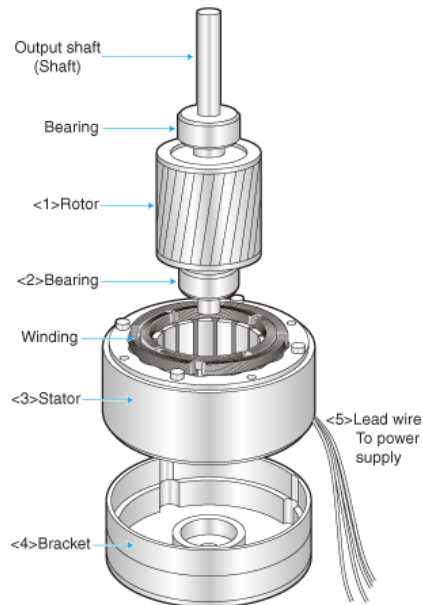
MOTOR COMPONENTS (NICDEC)
